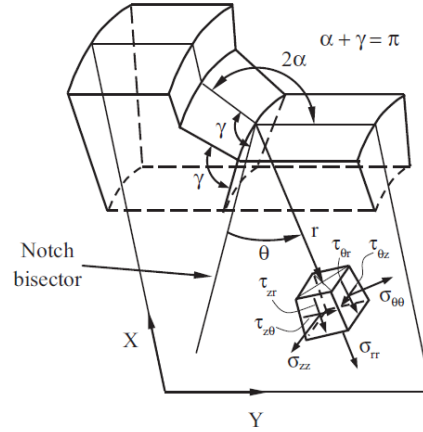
Polar reference system centered at the weld toe of a typical tube-to-flange welded joint geometry, [17].
